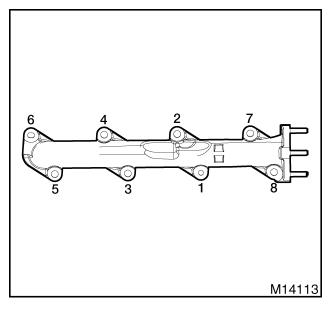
Torque sequence for left exhaust manifold mounting bolts
